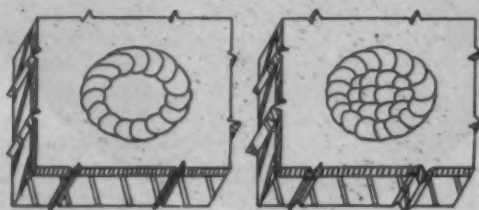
Ring welding procedure recommended for plug welding by manual shielded metal-arc process.
